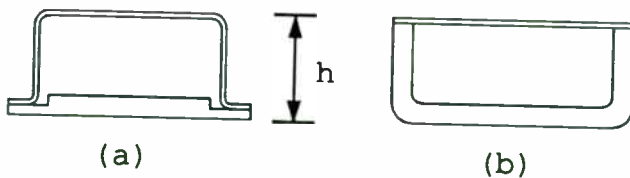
Cross section of a sealed (a) platform package, (b) unibody package
